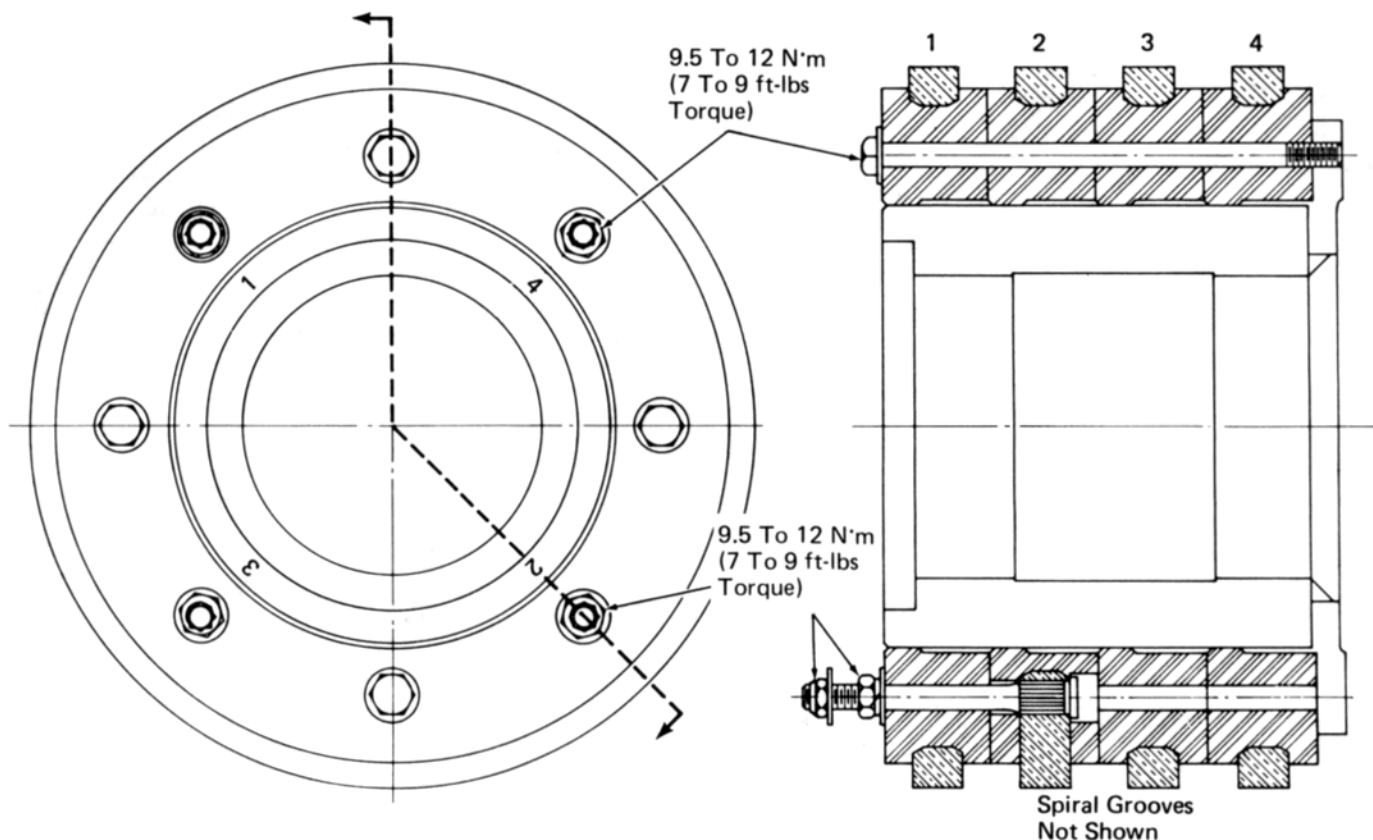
AR-Type (AC Machine) Collector Ring Assembly
